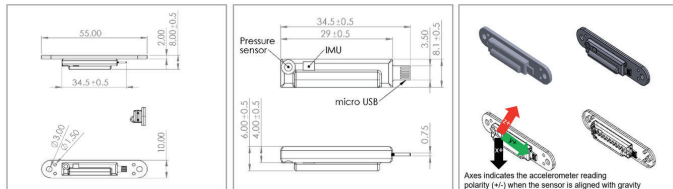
Technical drawings and dimensions in mm of the microtag devices (from [15])
